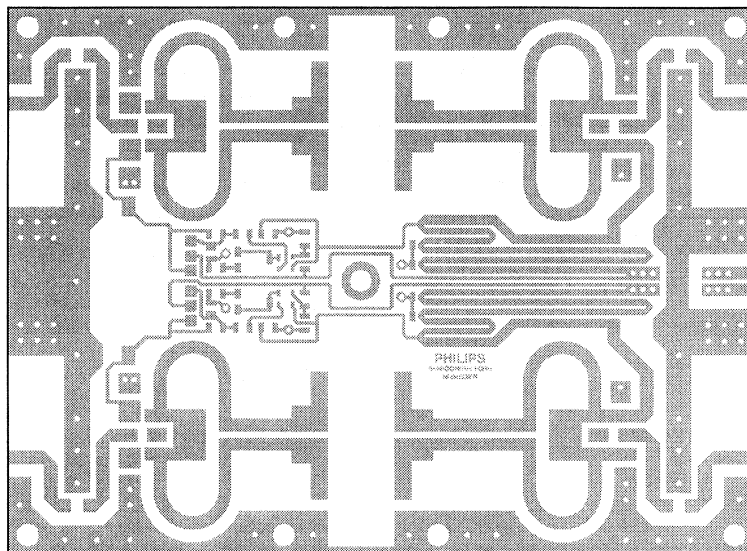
Printed-circuit board Dimension of the BLV859 amplifier.
